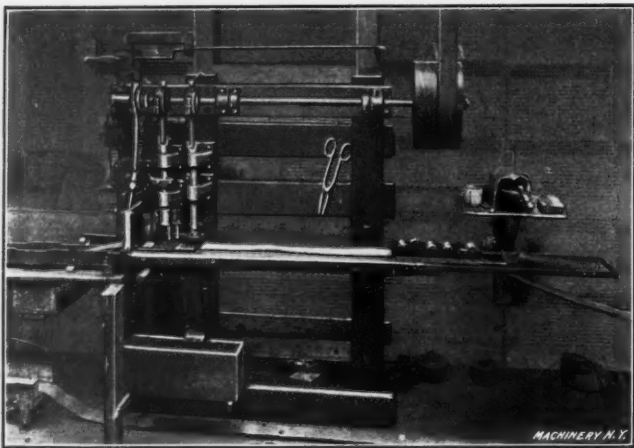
Special Automatic Machine for Edging, Punching and Shearing off the Fins
